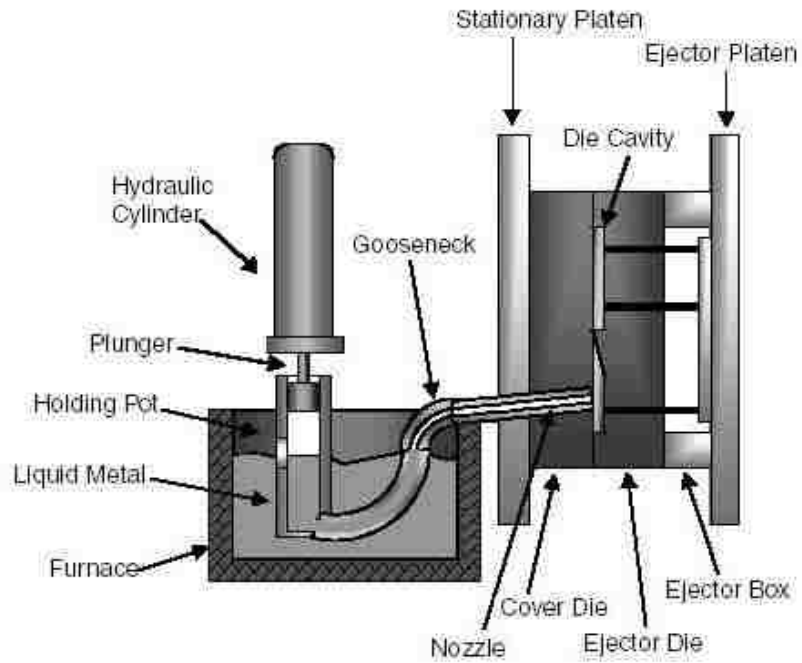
Schematic diagram of a hot-chamber die casting machine [11].
